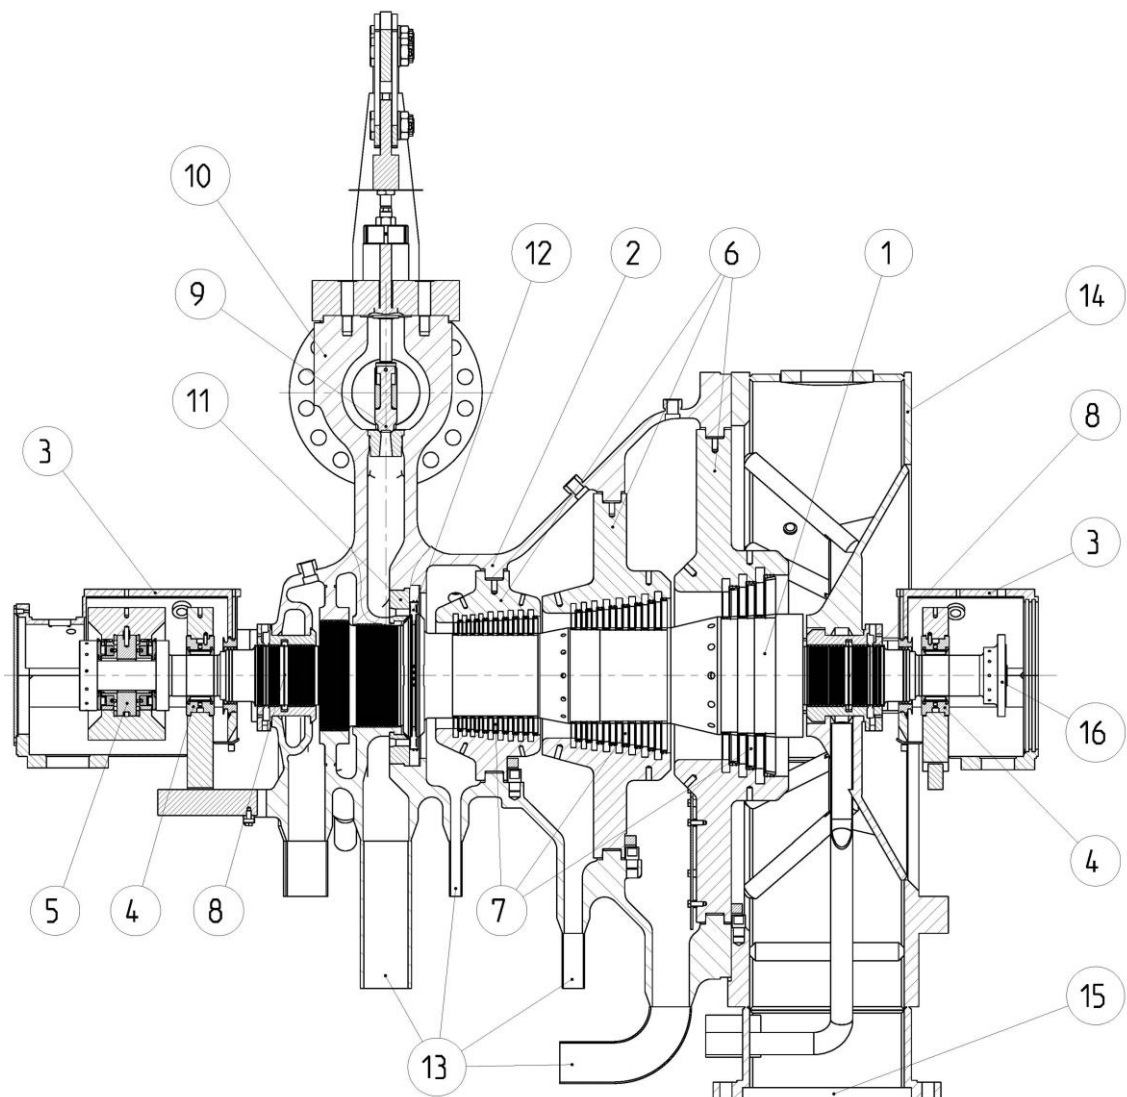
Sectional drawing of a MARC steam turbine. Source: [6]
